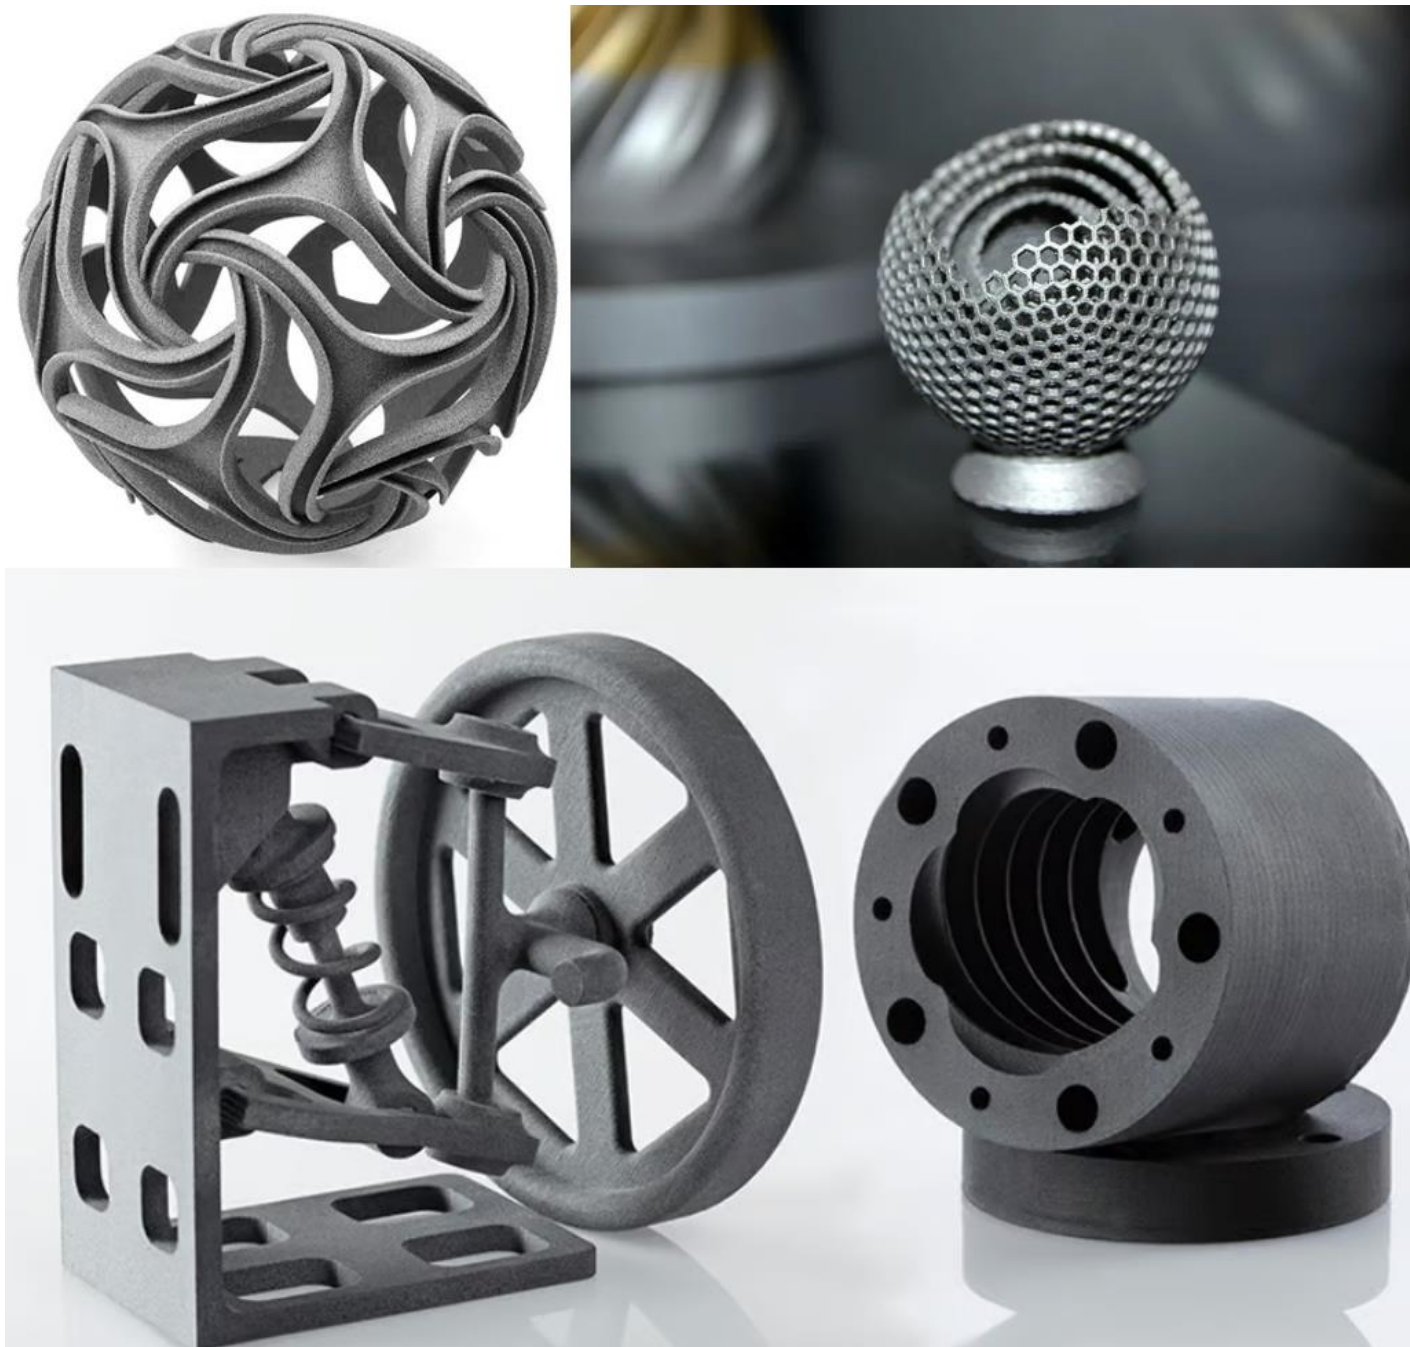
Example of SLM part, it can't be manufactured with other process due to its complex geometry.
